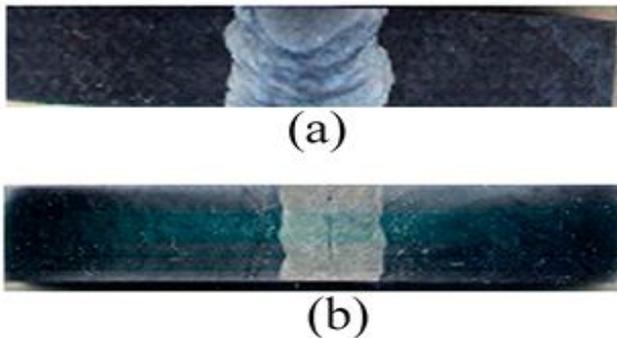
Welded Samples of (a) CCGTAW, (b) PCGTAW
